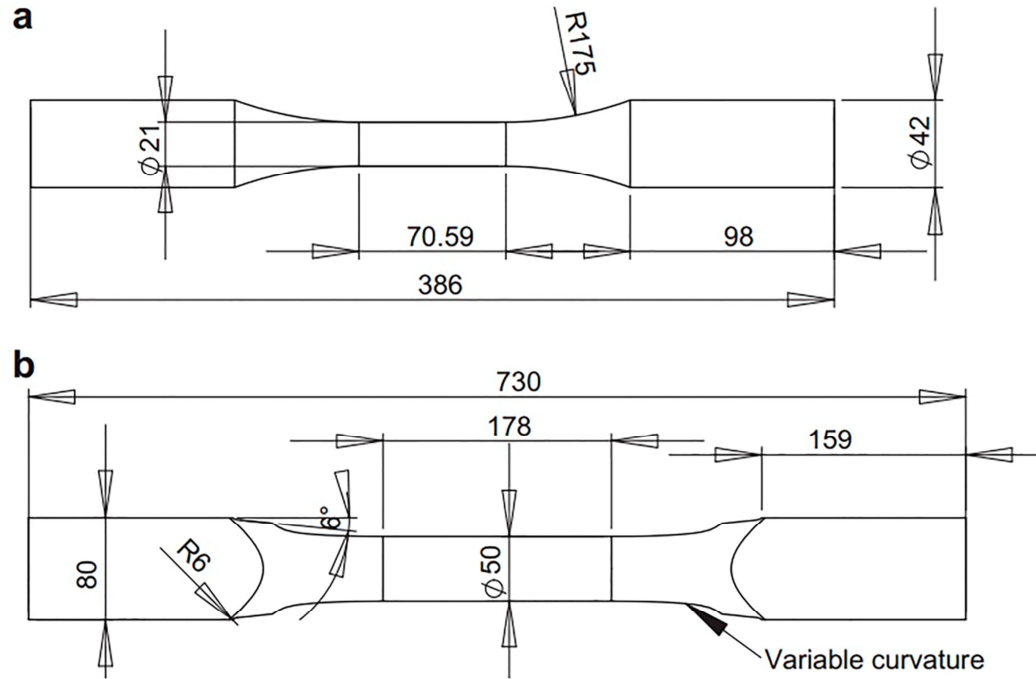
Detail drawings of (a) Ø 21 and (b) Ø 50 specimens (all dimensions are in mm).[83]
